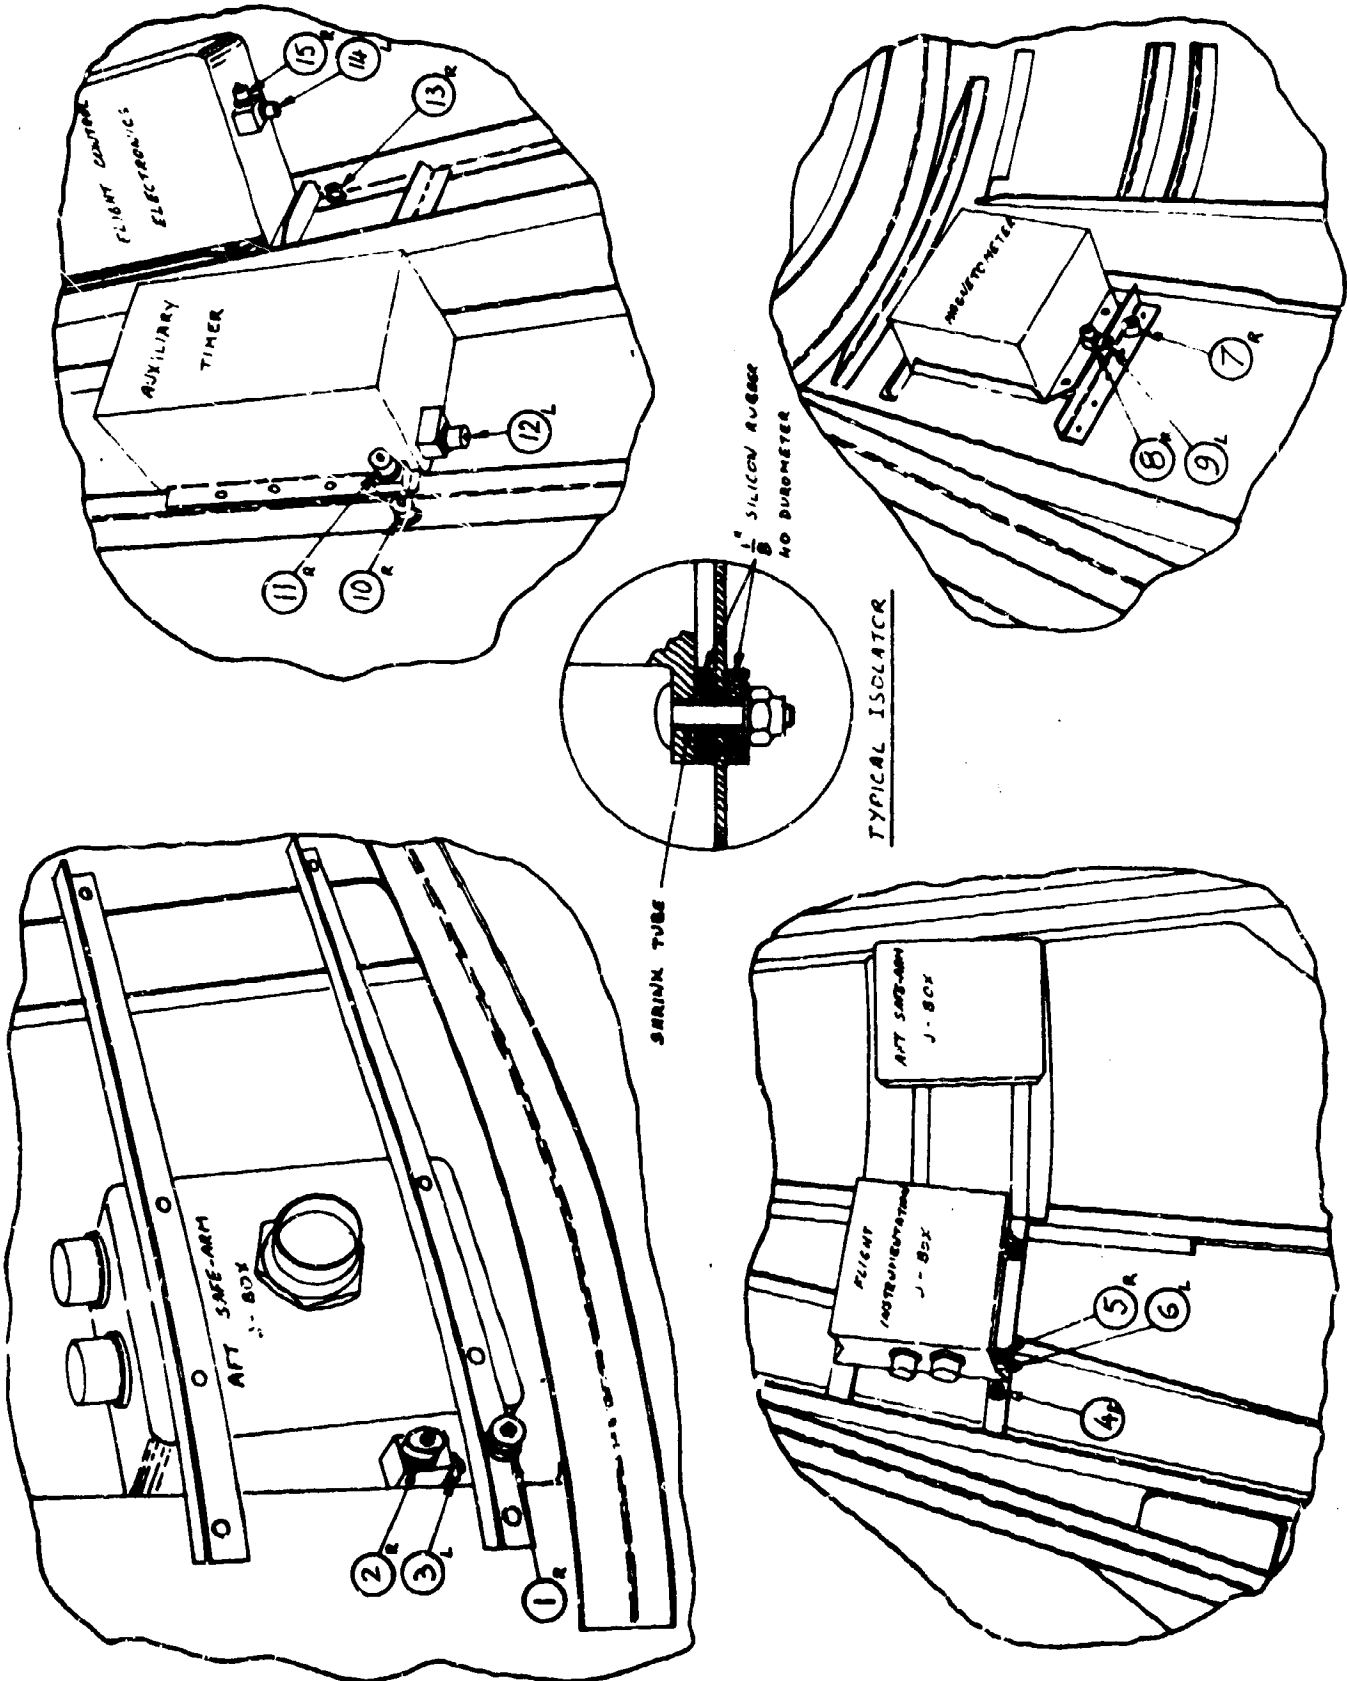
DETAIL OF ACCELEROMETER LOCATIONS ON EQUIPMENT AND A TYPICAL ISOLATOR
